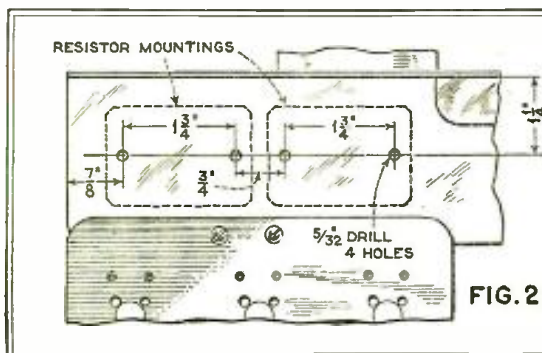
Details of assembly showing location of resistance-coupled units behind the tube sockets
